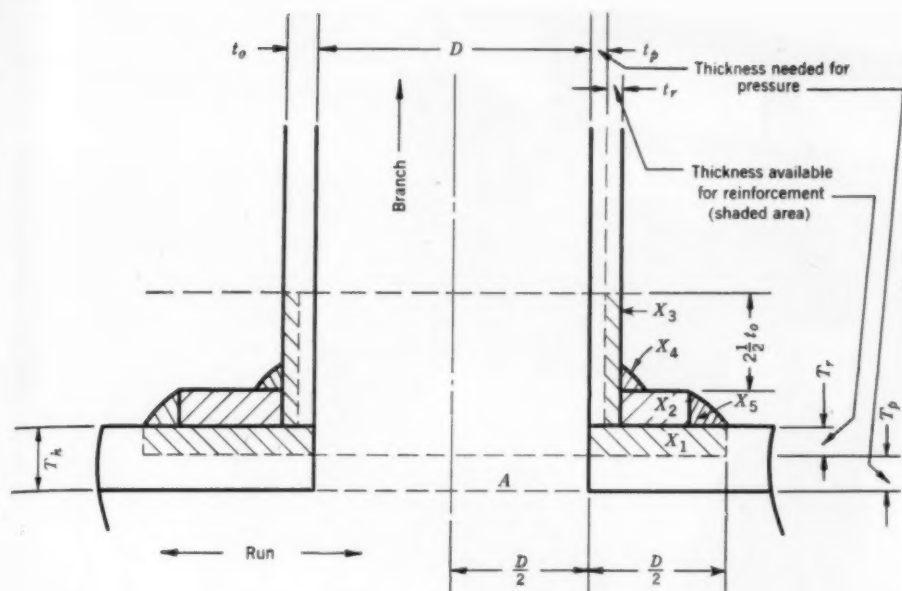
Reinforcement of Openings in Welded Pipe
